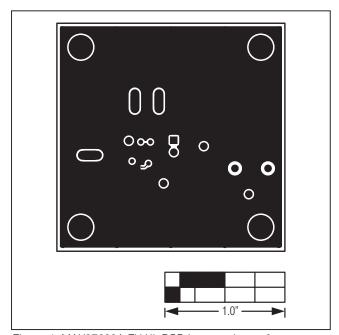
MAX97200A EV Kit PCB Layout—Layer 2
